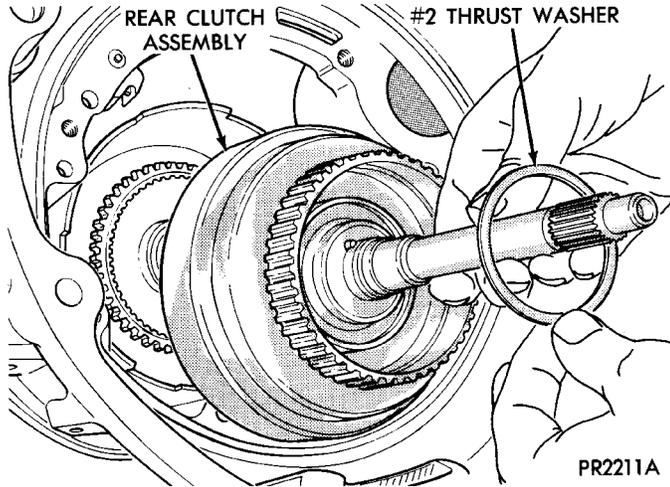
No. 2 Thrust Washer and Rear Clutch
